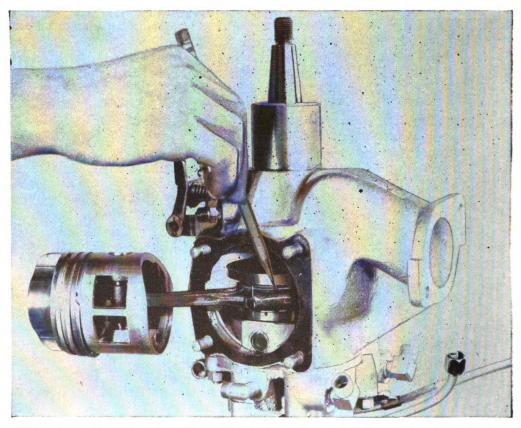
Testing rod and cap alignment to determine that surfaces are flush.
